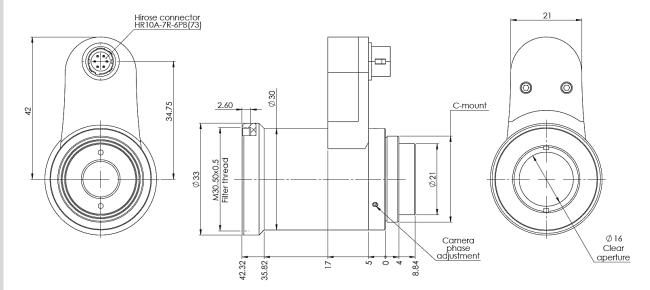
Mechanical drawing of the ELM-8-5.6-11-C
